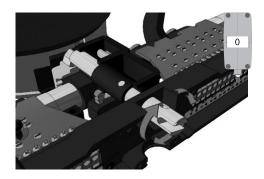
Initial state: ISM is open and locked. Turn interlocking shaft clockwise to unlatched position.
